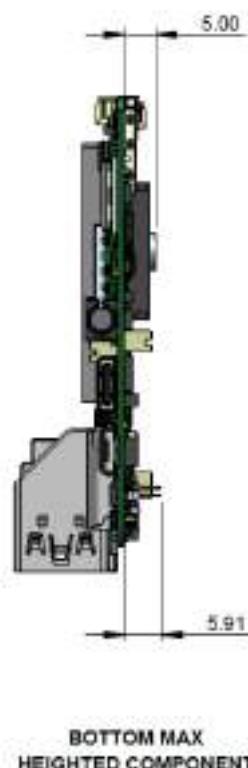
i.MX 8M Plus Pico ITX SBC Mechanical Dimensions - Side View 2
